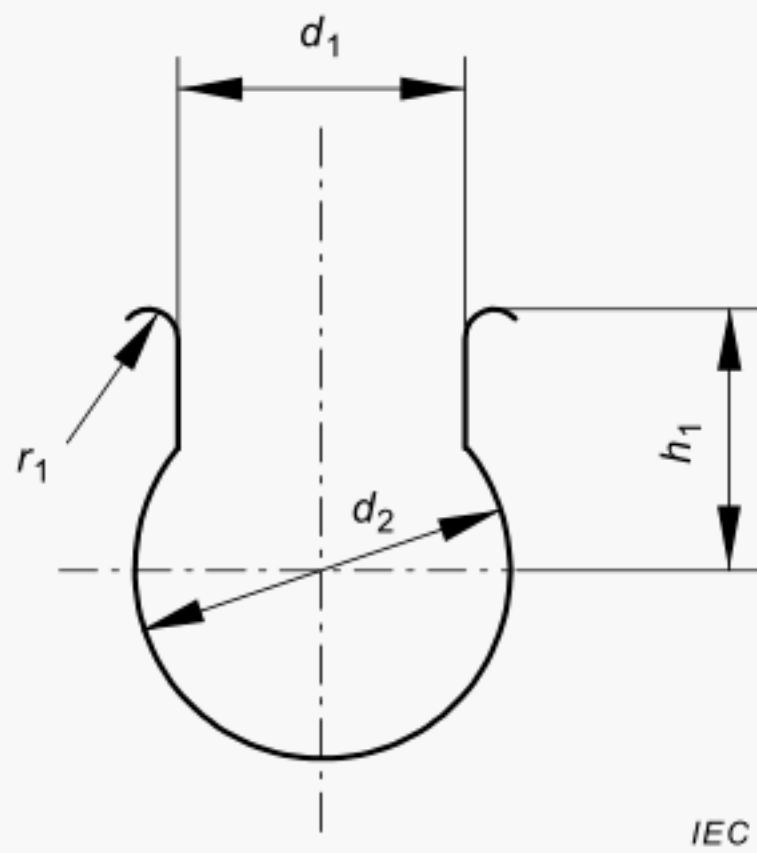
Dimensions of NOT GO gauges for ball couplings
